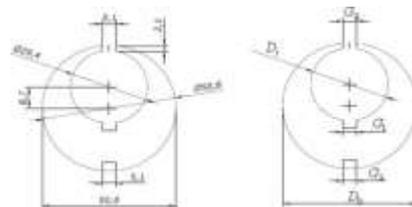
Shape and dimensions (mm) of the modified C-rings used.
